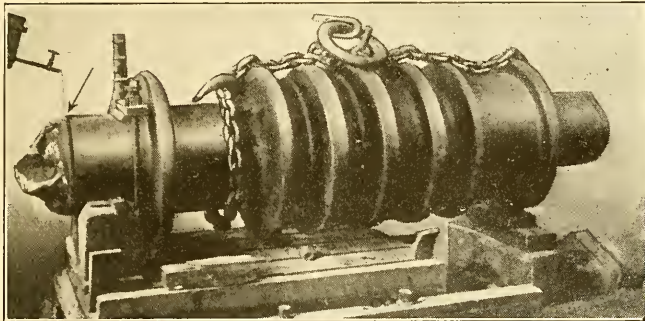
Sawing Off End of Neck Previous to Welding on a New One.
